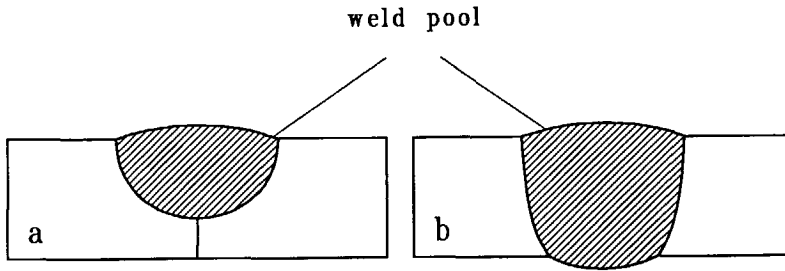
Schematic illustration of weld pool penetration:
